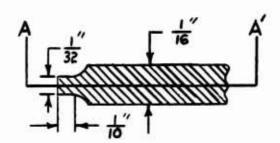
"Gleeble" Specimen With Reduced Face and the Weld at 45° to the Tensile Axis.
